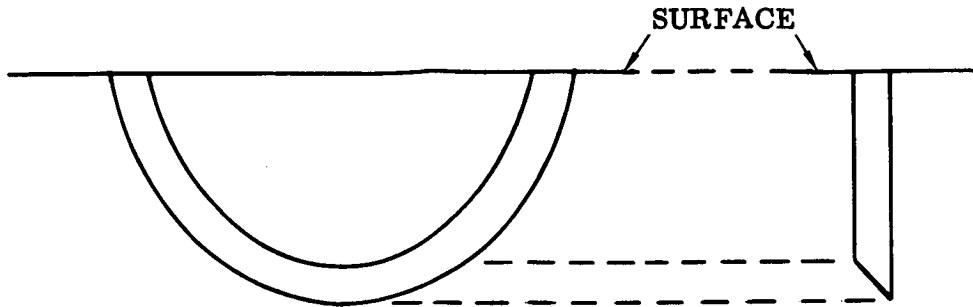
Shape of Surface Flaw in 1.0-Inch Plate Material
